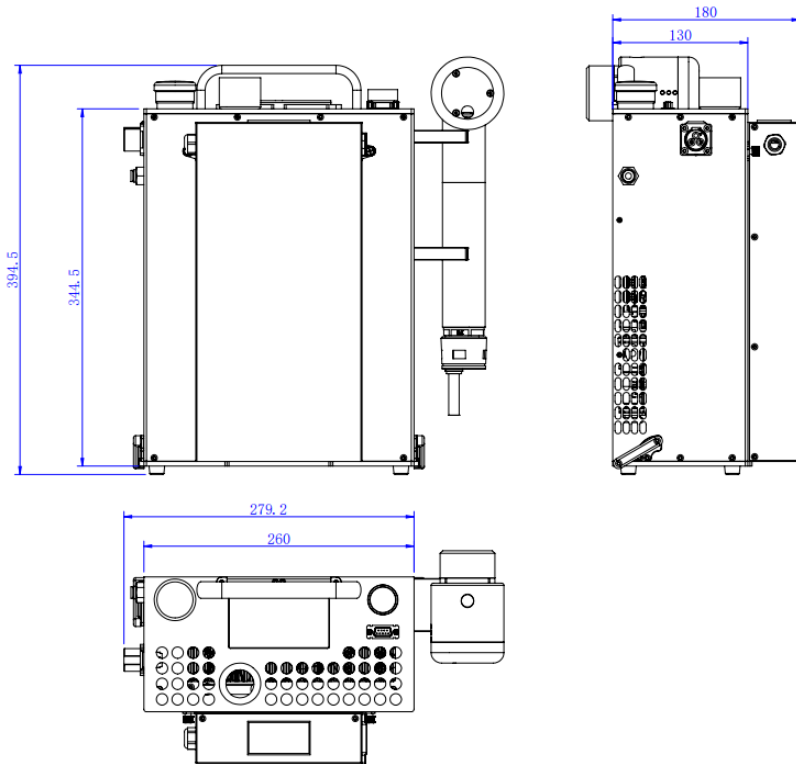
Dimensional diagram of GY-QCDXY200P laser cleaning machine
